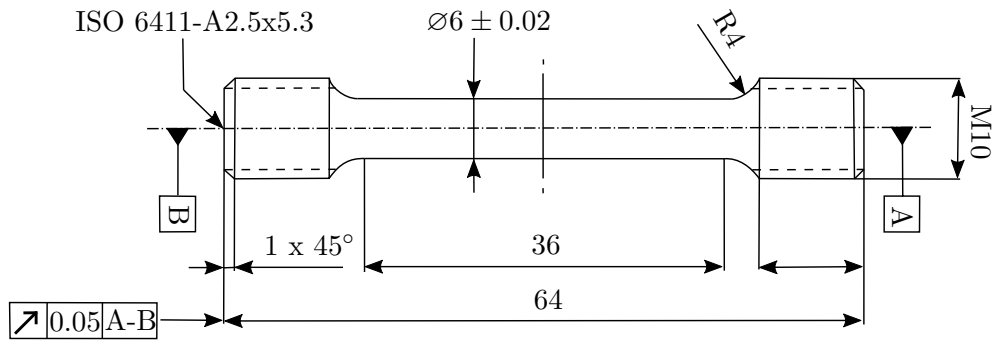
Technical sketch used for the machining of tensile specimens.
